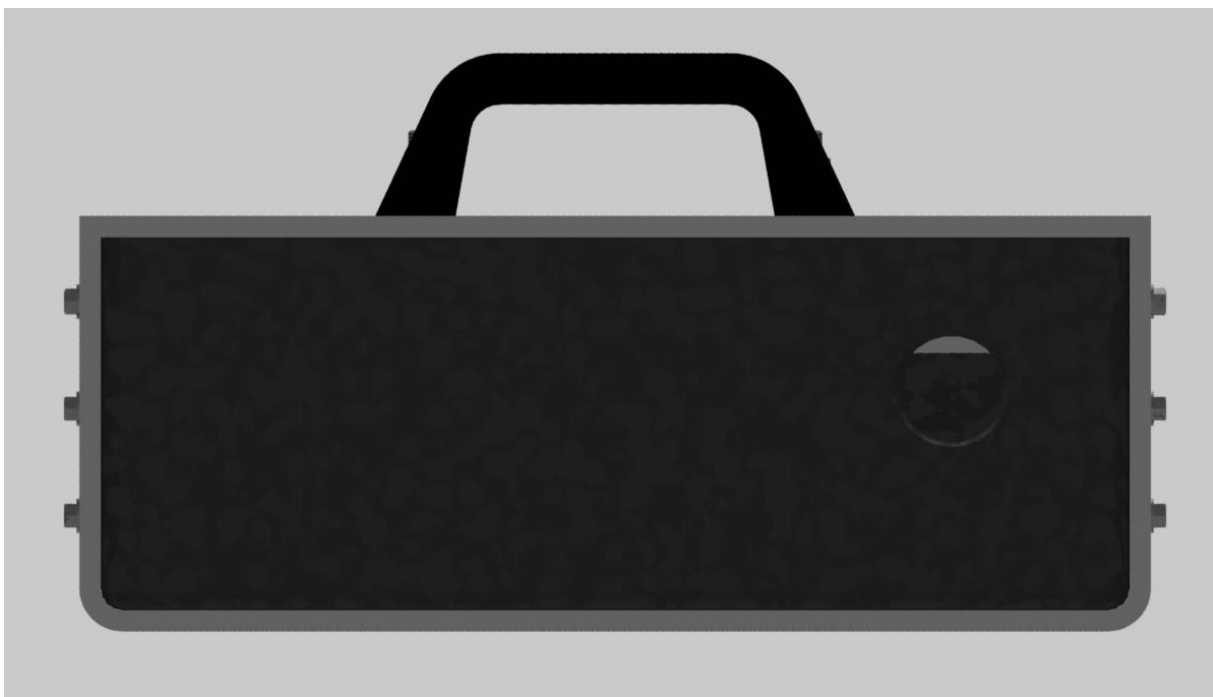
The back-view of the fully assembled ESS enclosure.
